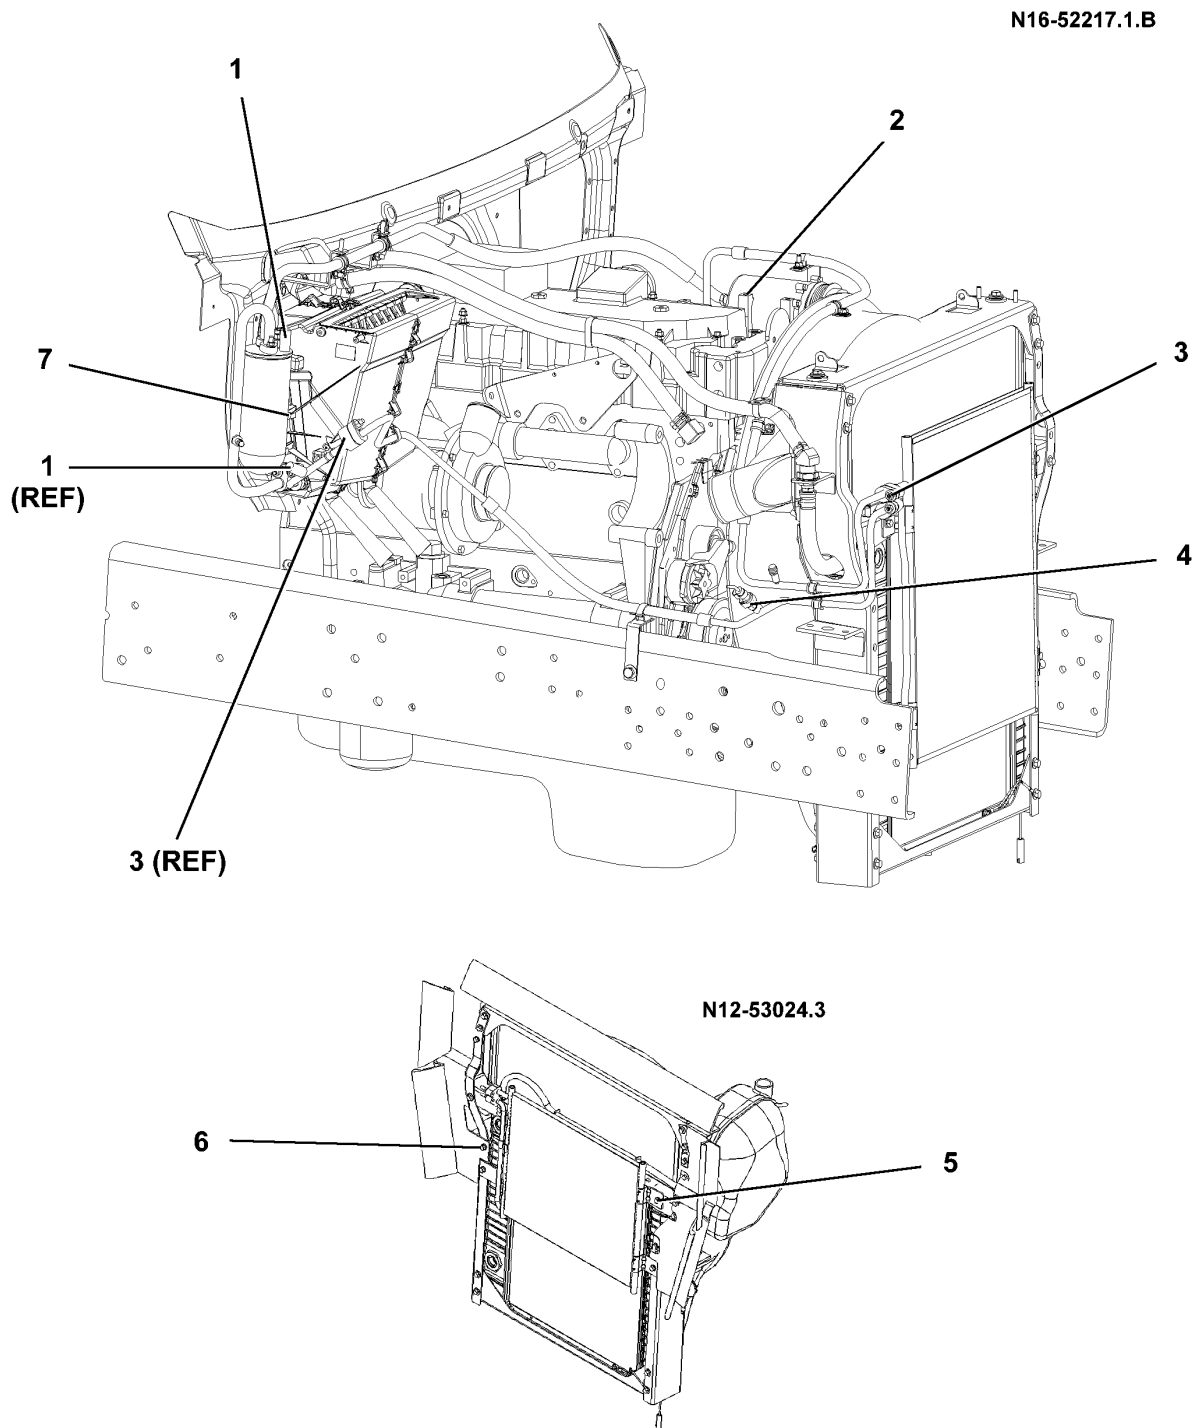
Torque Locations, View 1 (Pre-2004 I6 Engine Shown, Others Similar)
